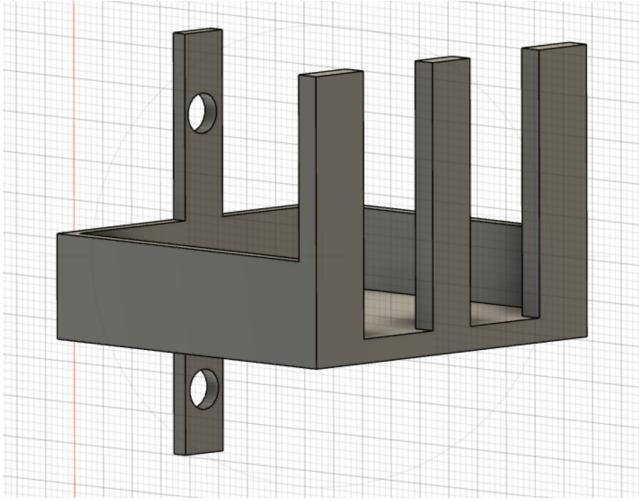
Holder for peristaltic pump. Connects to extrusion bars of frame.
